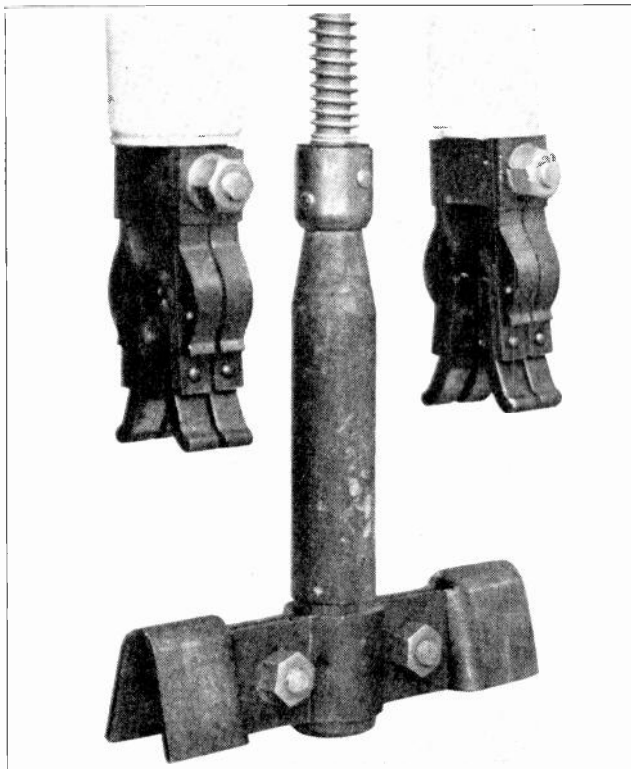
Close-up view showing the details of construction of stationary and movable contacts of an oil switch. The upper stationary contacts are supported on porcelain bushings and the lower movable contact on a wooden insulating rod. Courtesy of G. E. Company.
